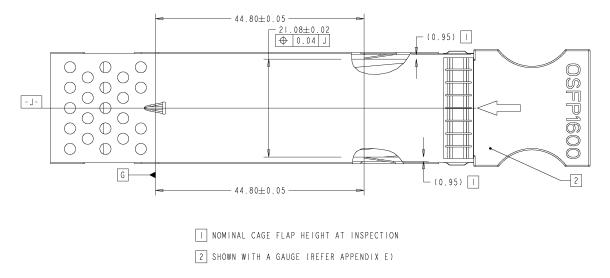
OSFP1600, cage latch flap, dimension from stop
